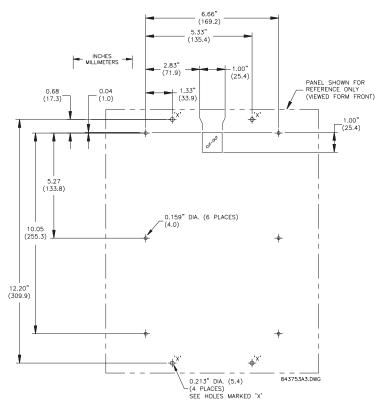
C30 VERTICAL SIDE MOUNTING REAR DIMENSIONS
